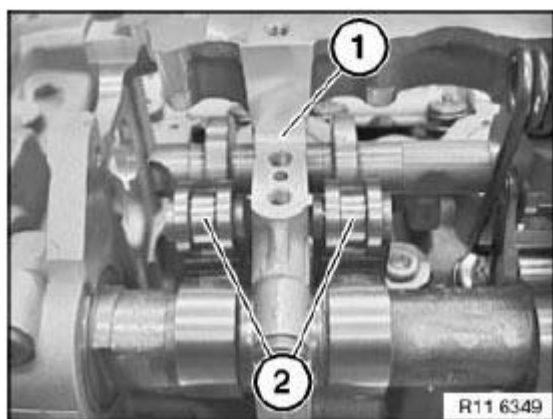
Identifying Contact Surfaces And Intermediate Levers
